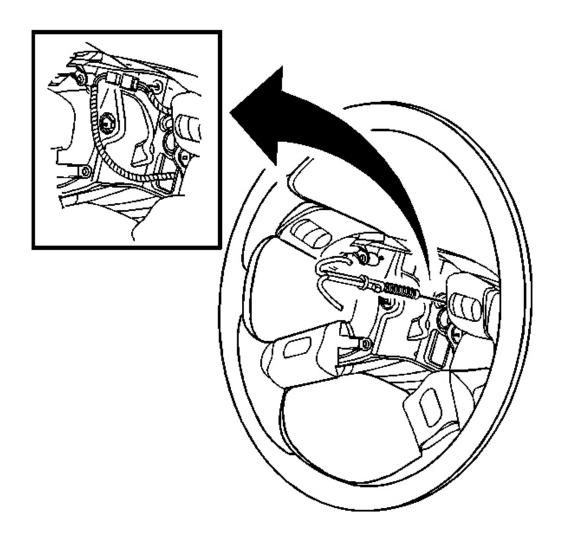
Steering Wheel Electrical Connector Courtesy of GENERAL MOTORS CORP.
